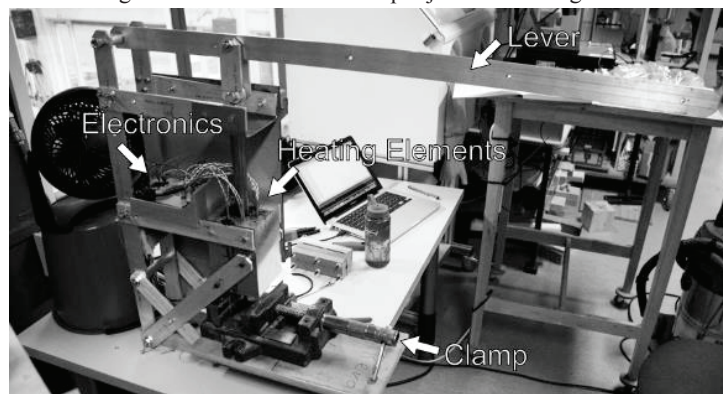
The desktop injection molding machine in use: Clearly visible are the heating elements and the electronics, as well as the clamp for holding the molds. The long lever is for manually injecting the molten plastics.
